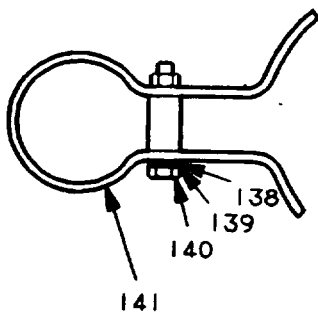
SHELTER ASSEMBLY (SHEET 10 OF 24)
